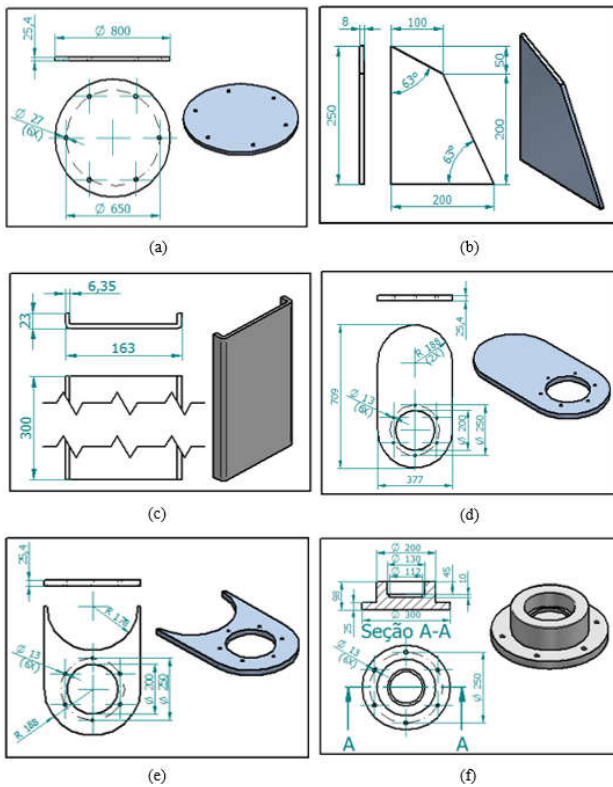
Components of the central column: a - base plate, b - lower base reinforcement, c - stop, d - upper plate, e - lower plate, f - bearing bushing
